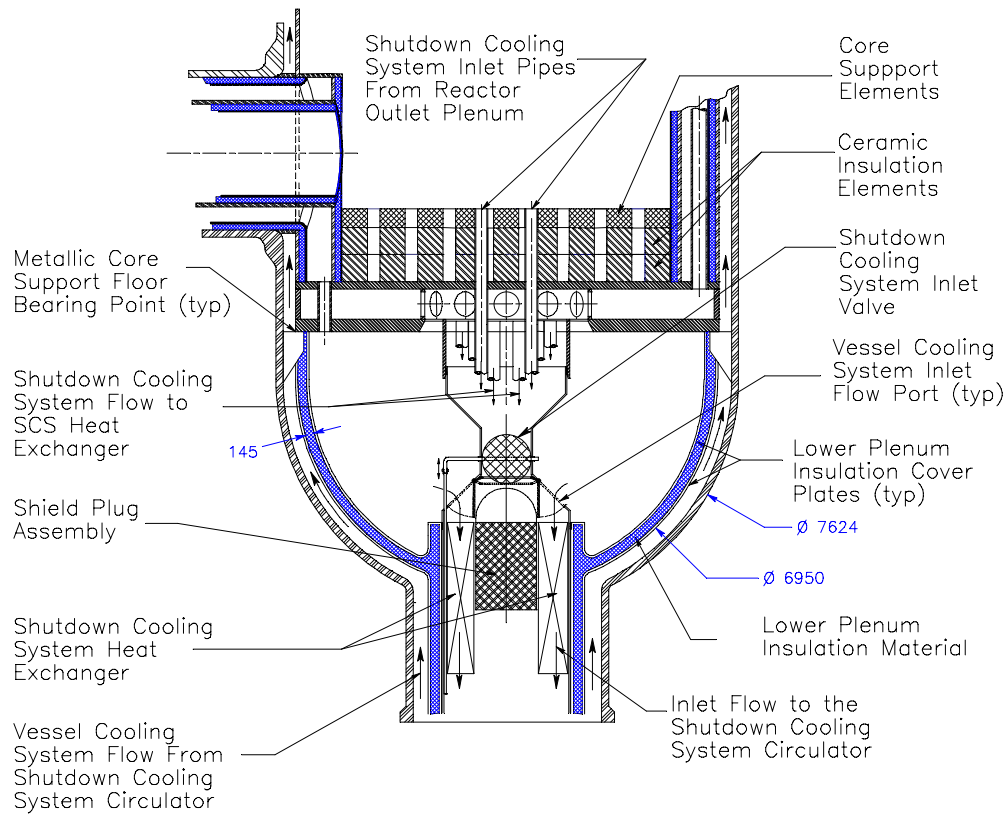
Bottom plenum and SCS insulation cover sheets
